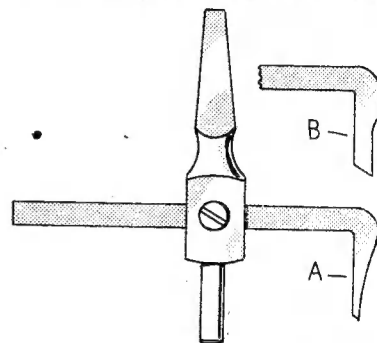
Hole-cutter. Tool ("A") for wood and tool ("B") for sheet metal
